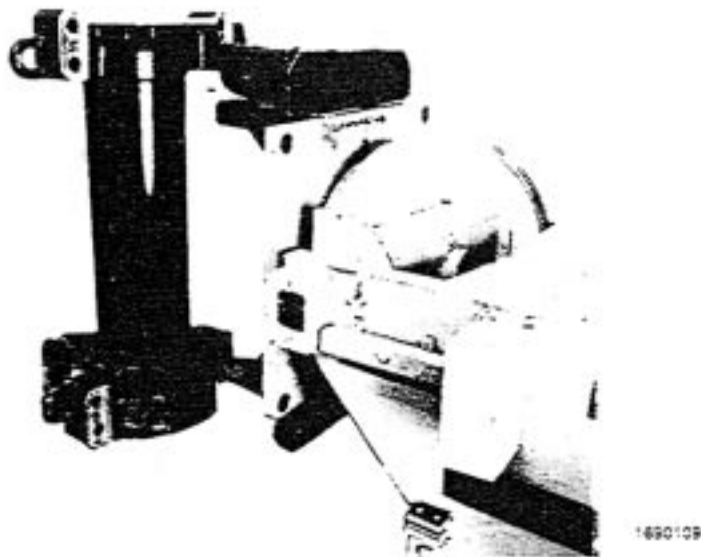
Housing Turnover Device is Capable of Rotating the Housing Through Both the Vertical and the Horizontal Positions.
